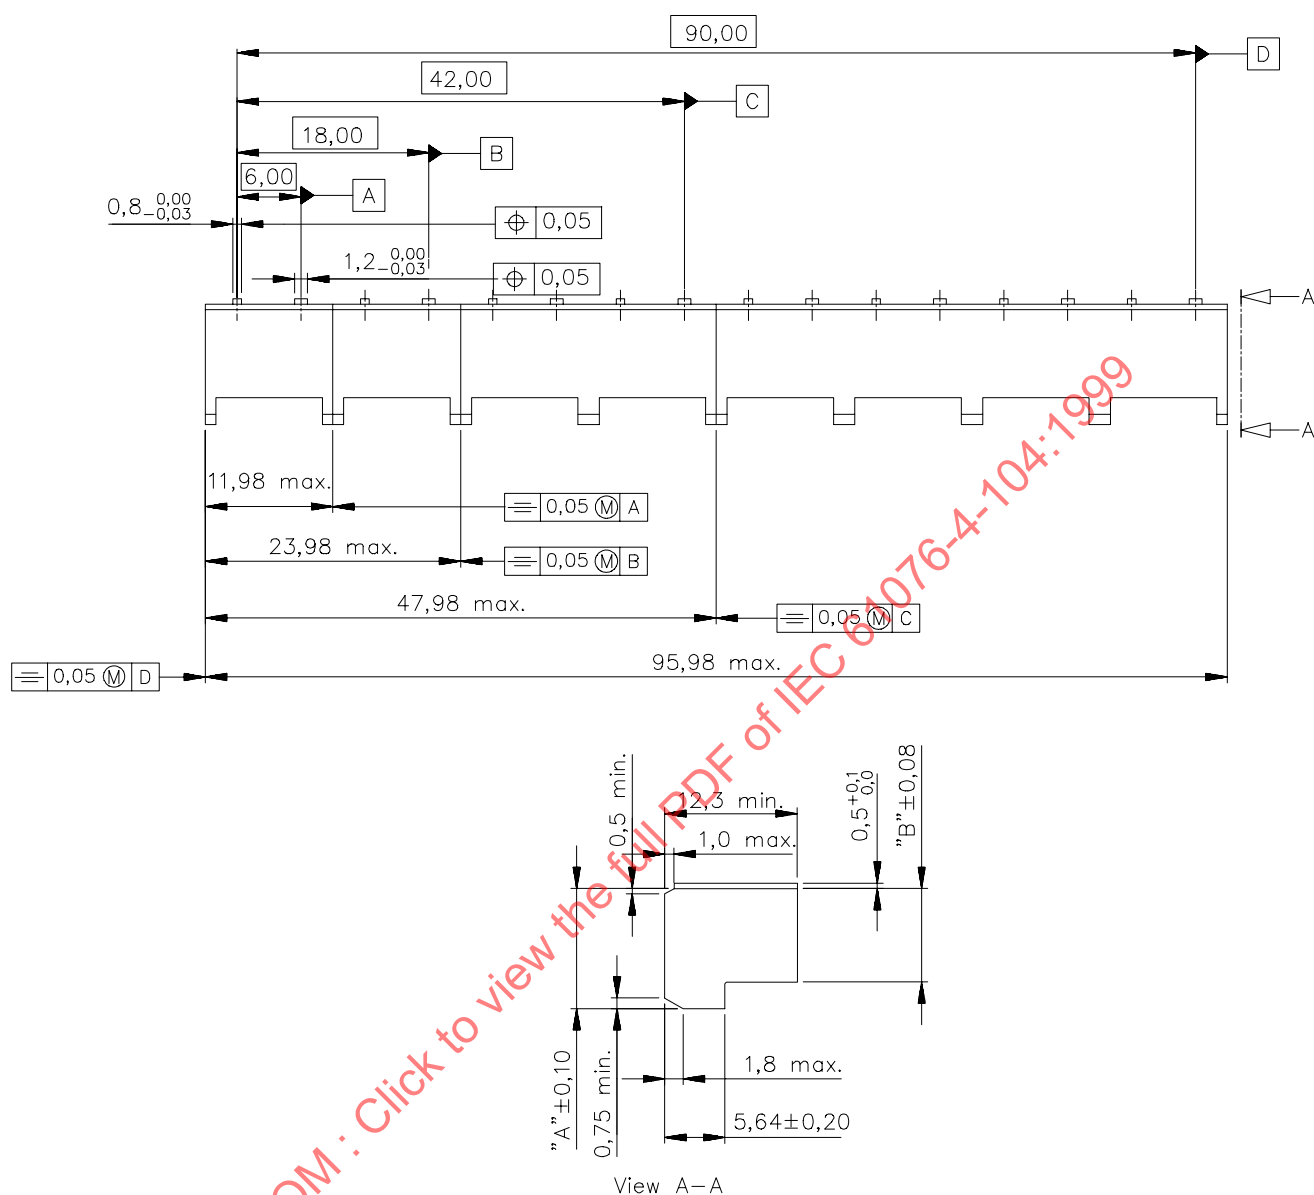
Dimensions of free board connector module housings, styles PD, PE, RD, RE, TD and TE
